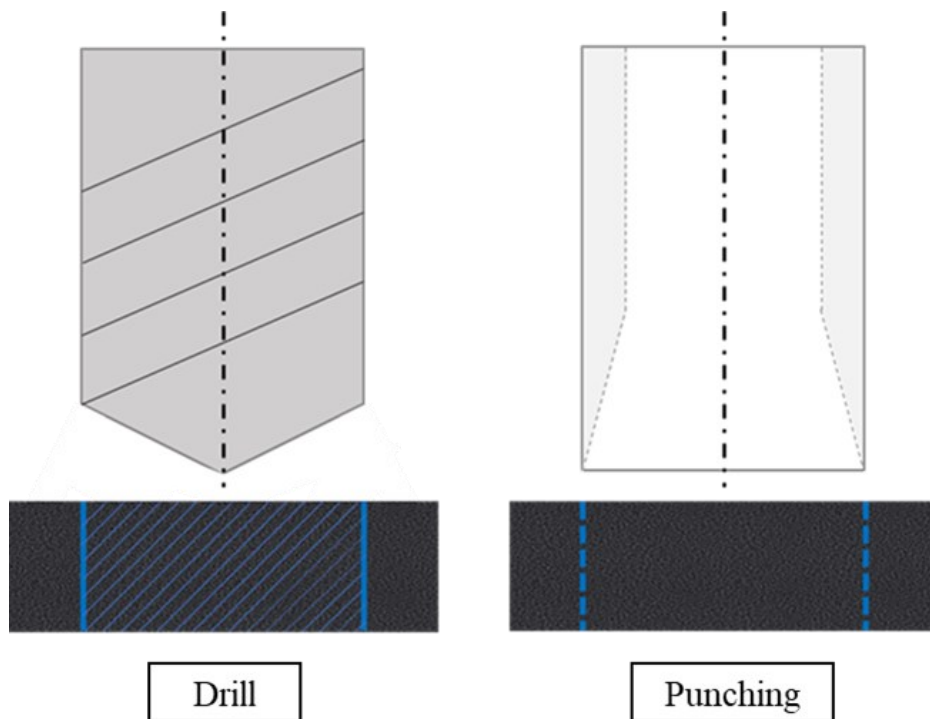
Comparison of machined part of drill and machined part of punching
